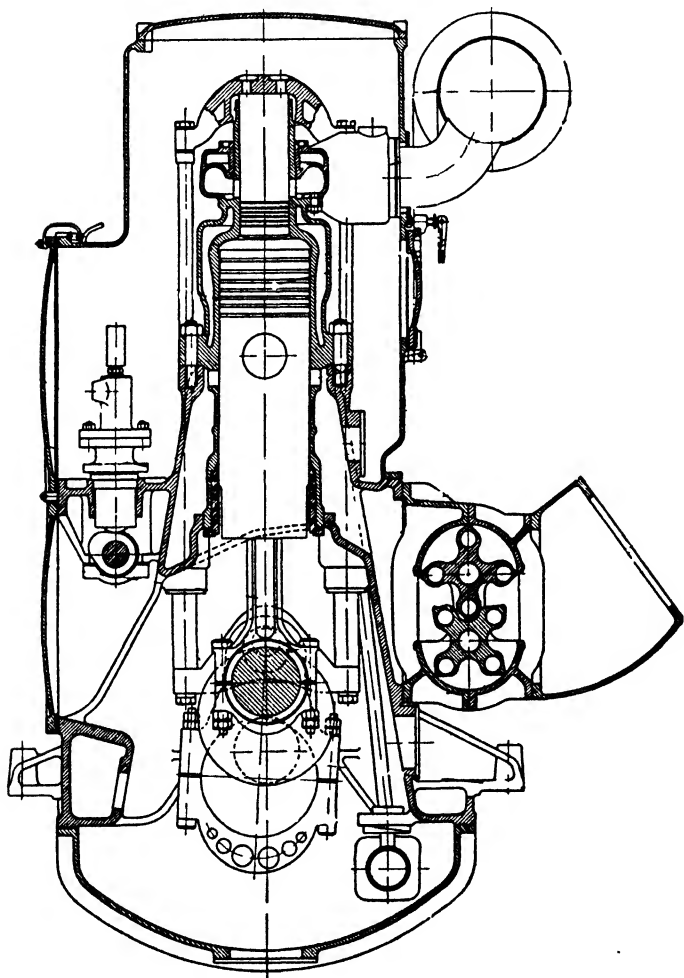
BURMEISTER & WAIN TWO-STROKE ENGINE IN CROSS SECTION.
